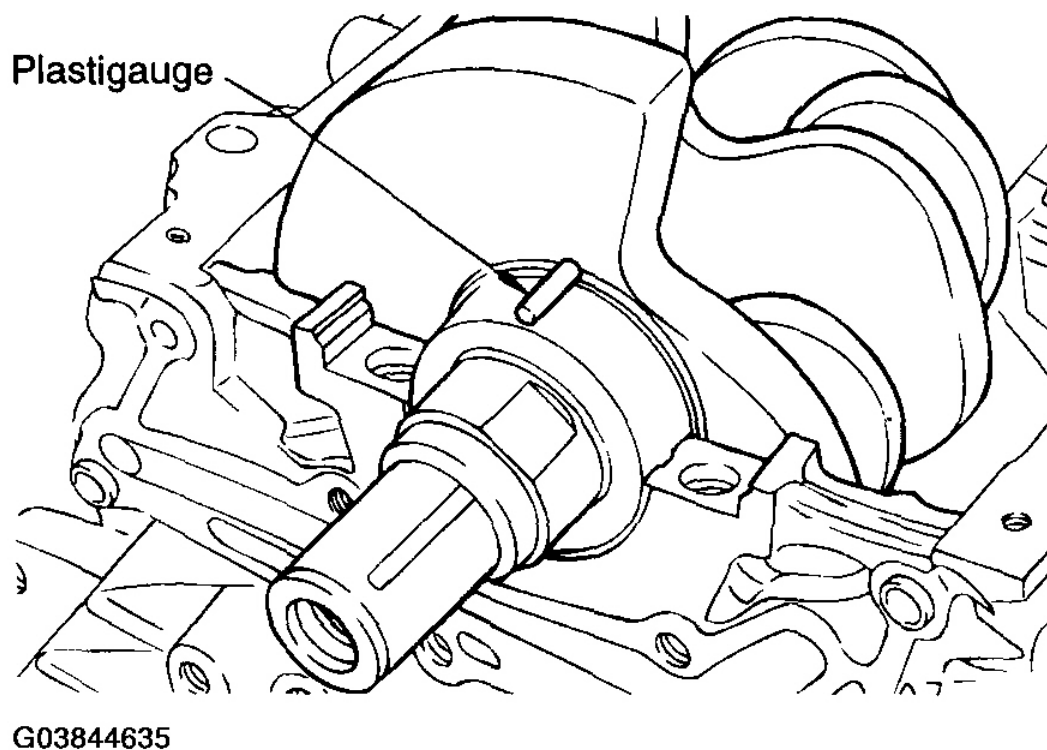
Measuring Oil Clearance (Plastigauge Method)
